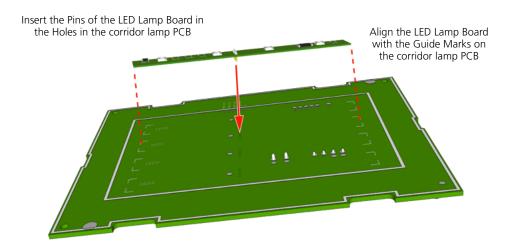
Plugging LED lamp board into the corridor lamp PCB
